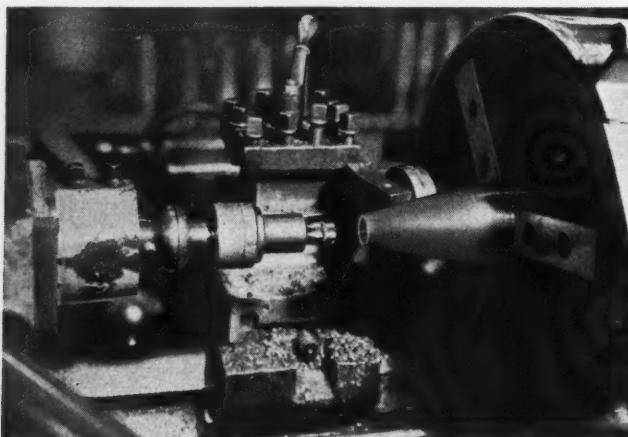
The Tail End is Tapped to Receive the Threaded Stud on the Tail Assembly
